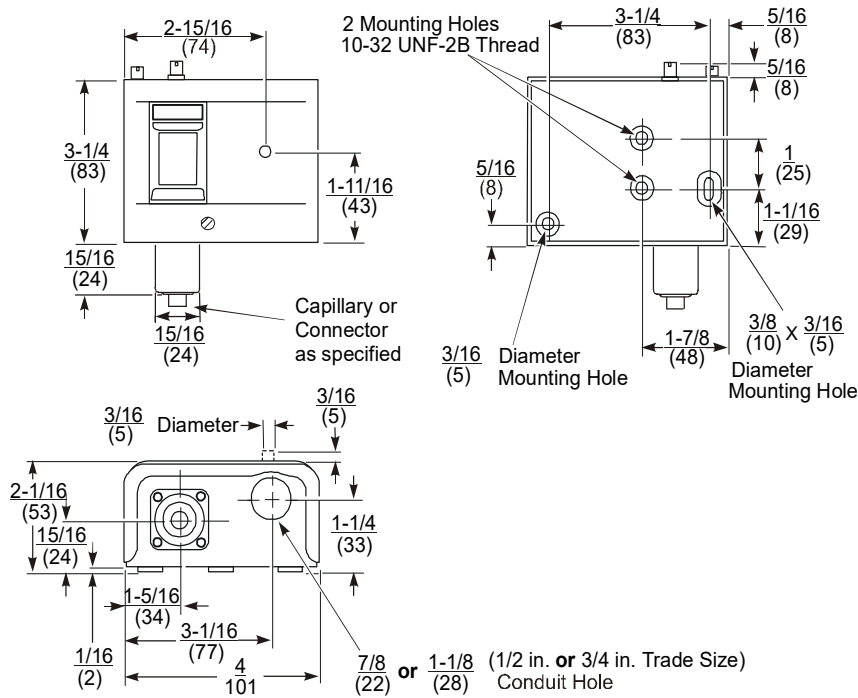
Dimensions for High Pressure Controls with NEMA 1 Enclosure, in. (mm)
